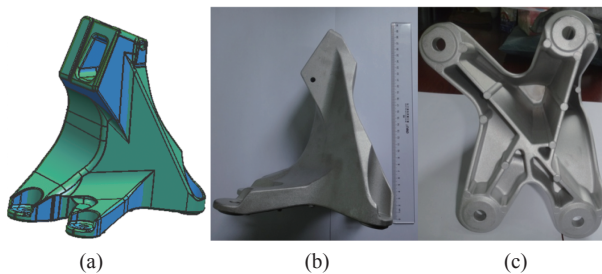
Engine bracket (chassis system) made from the JDA1 aluminum alloy. (a) Design drawings; (b) and (c) photograph of the casted component.
